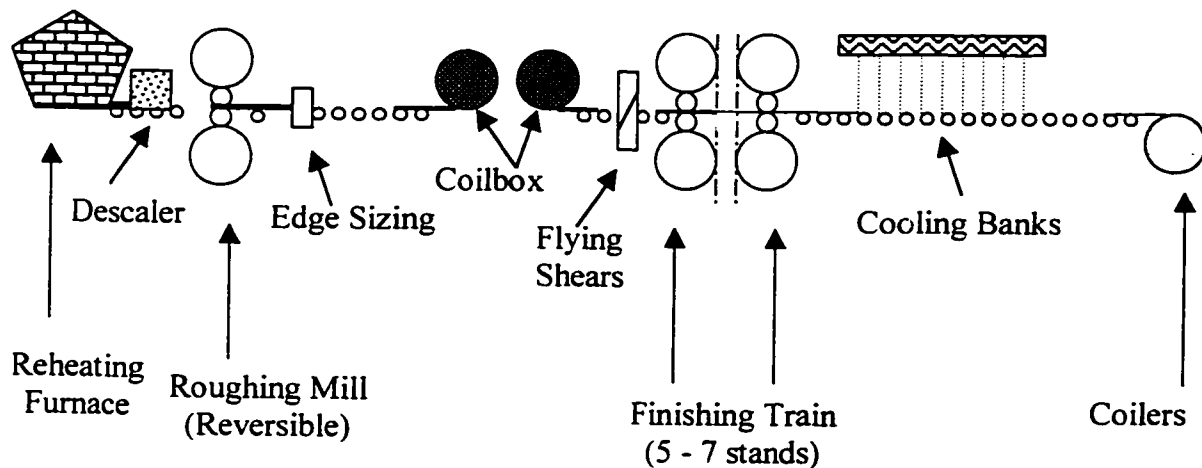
The Layout of the Mechanical Equipment of a Hot Strip Mill
